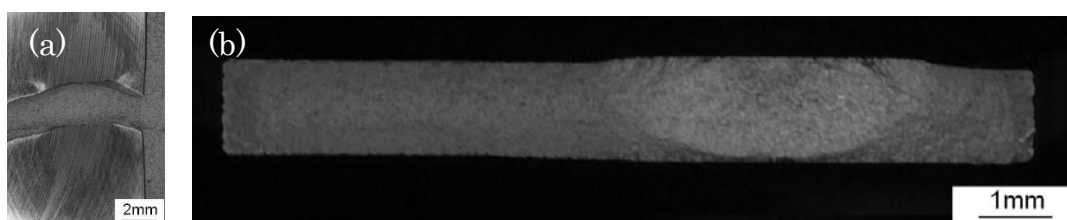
Typical fracture surface when a grinding mark is the crack origin
